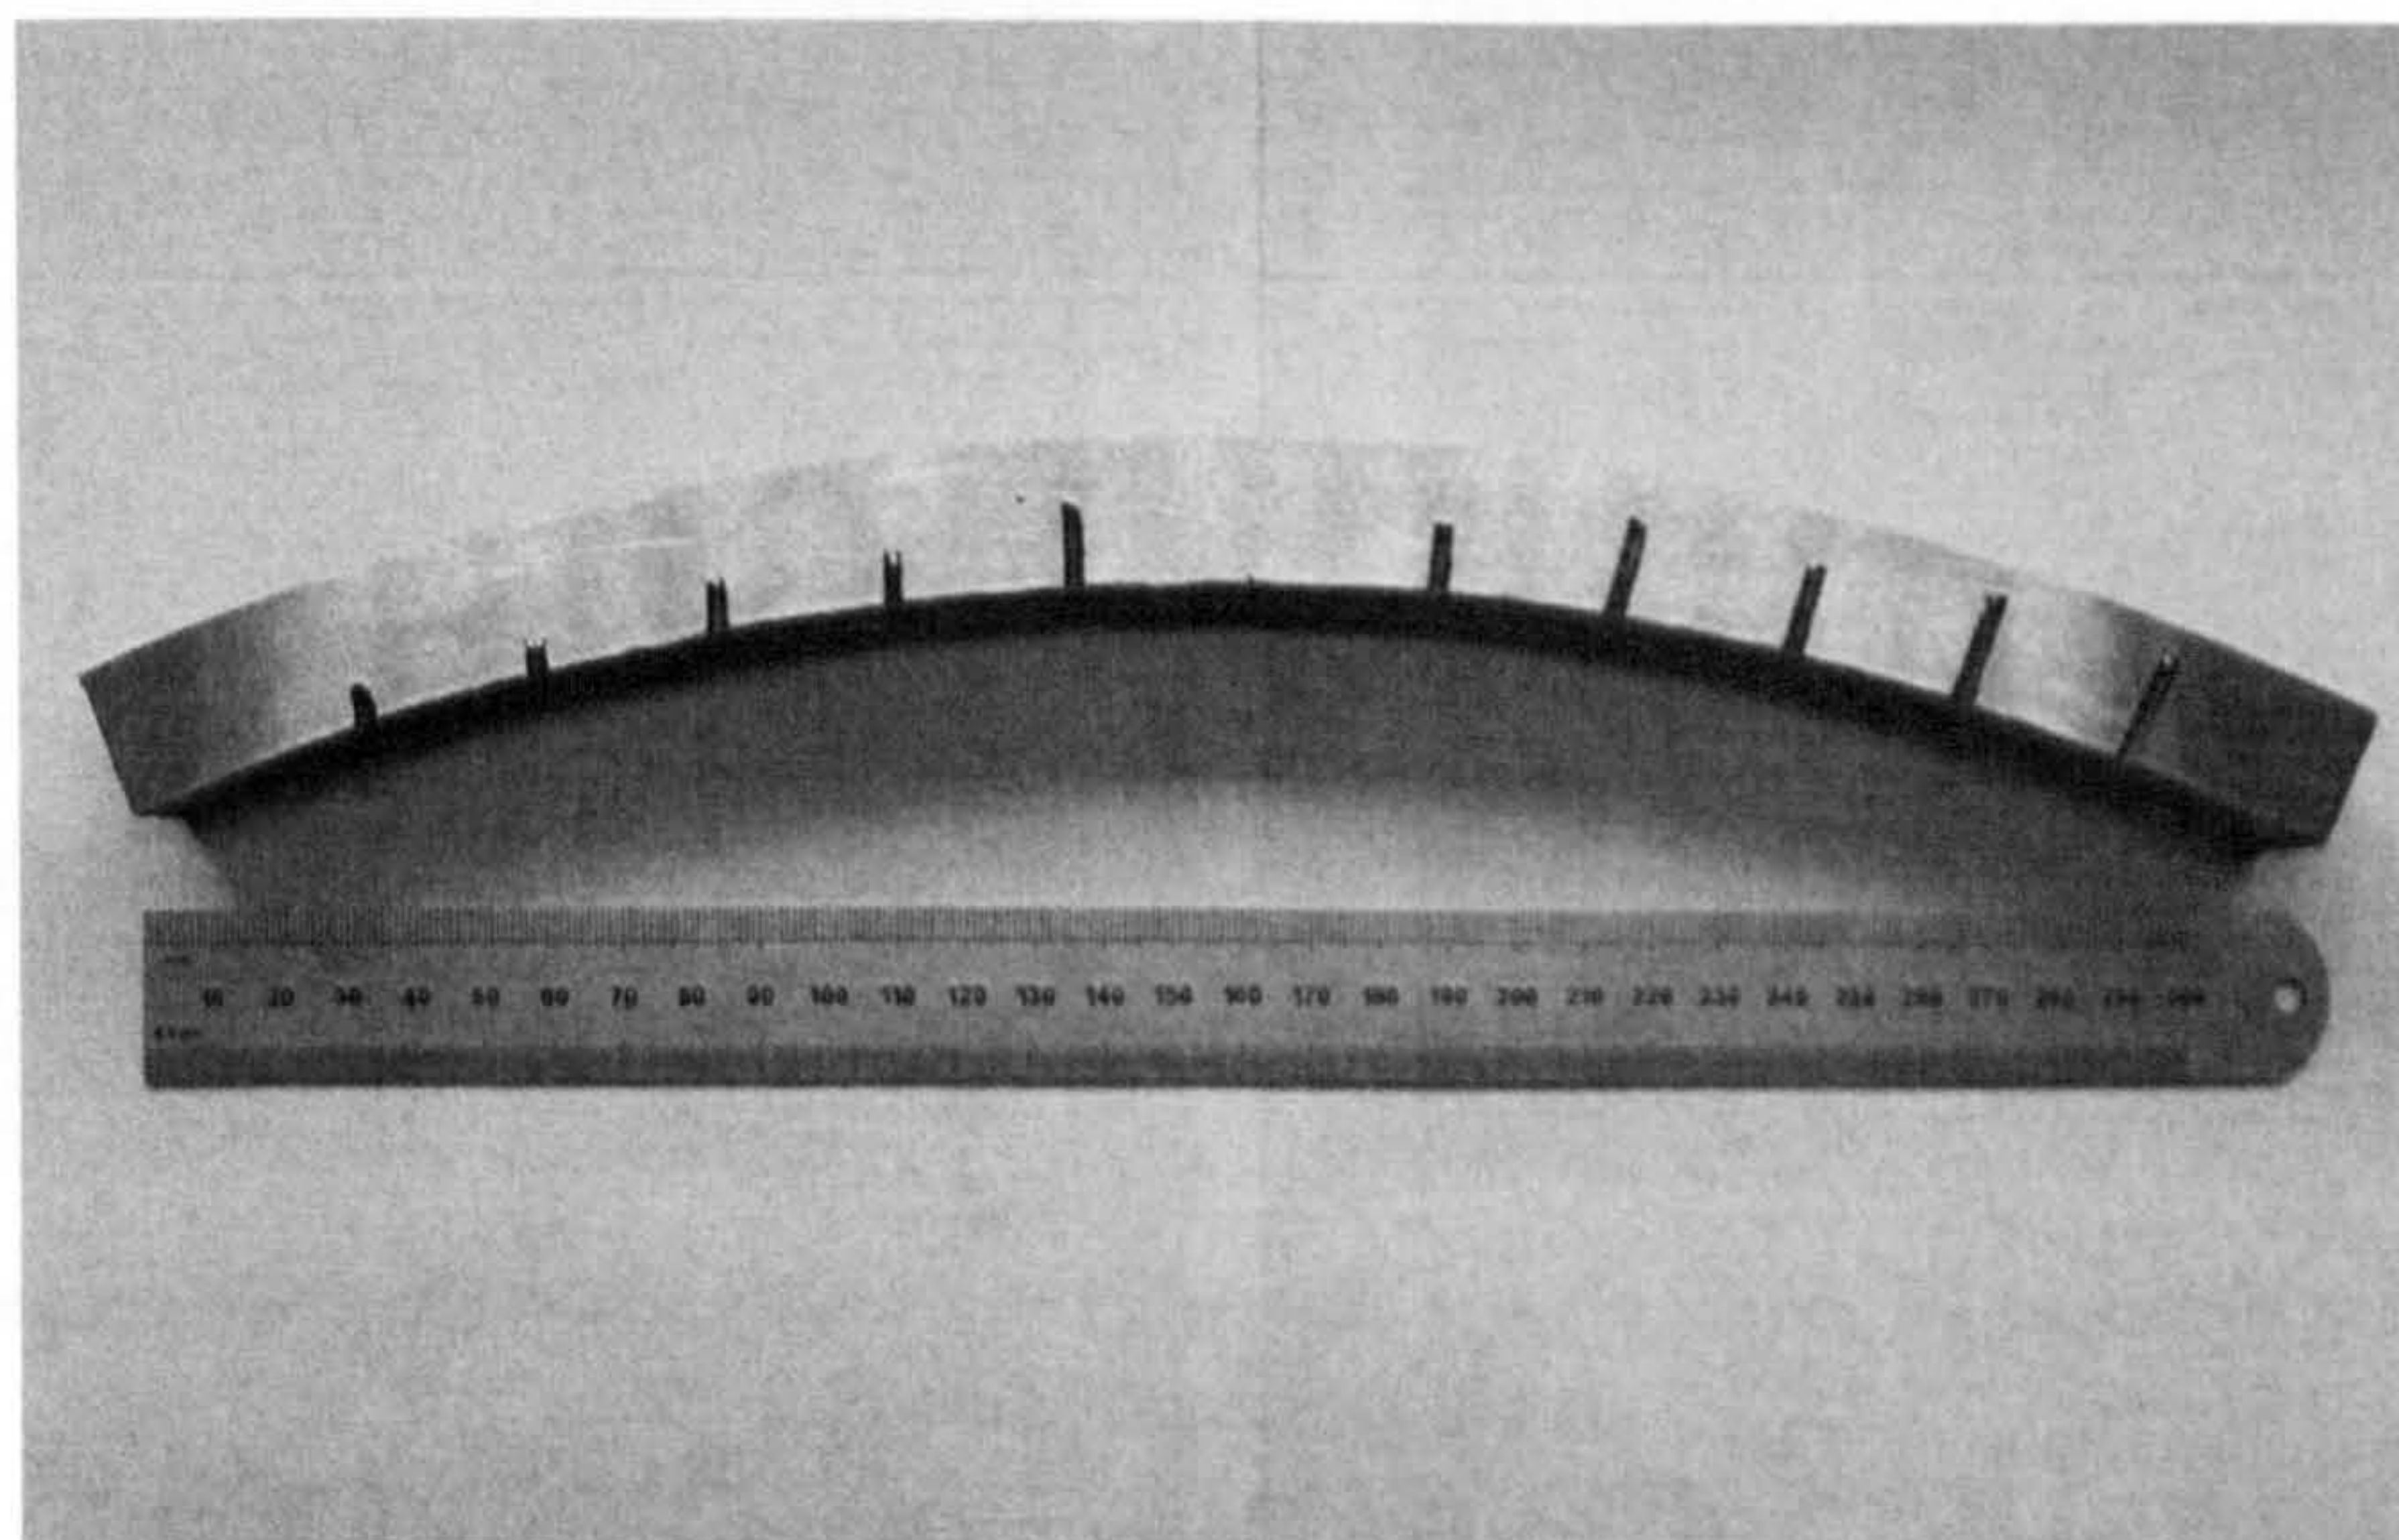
Typical weld longitudinal section showing drilled holes for thermocouple placement
